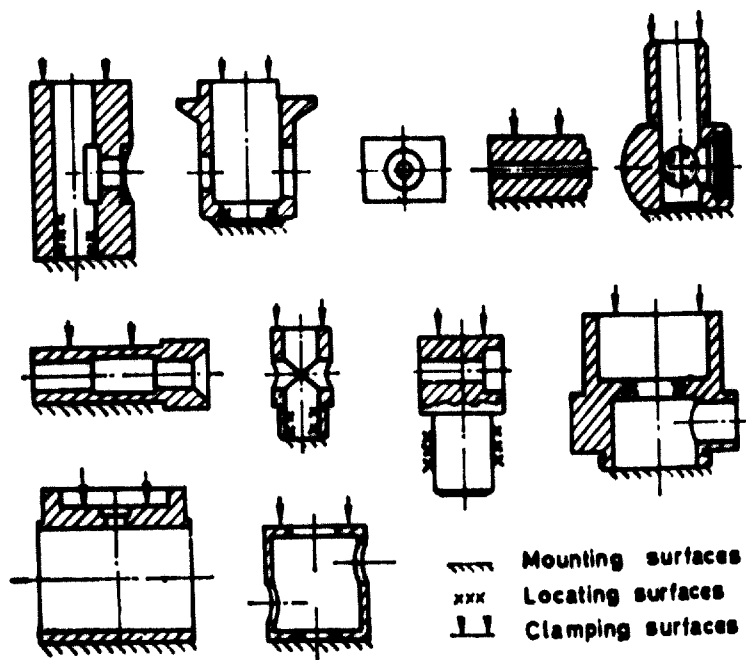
Parts with mounting surfaces which are difficult to fasten on a lathe
